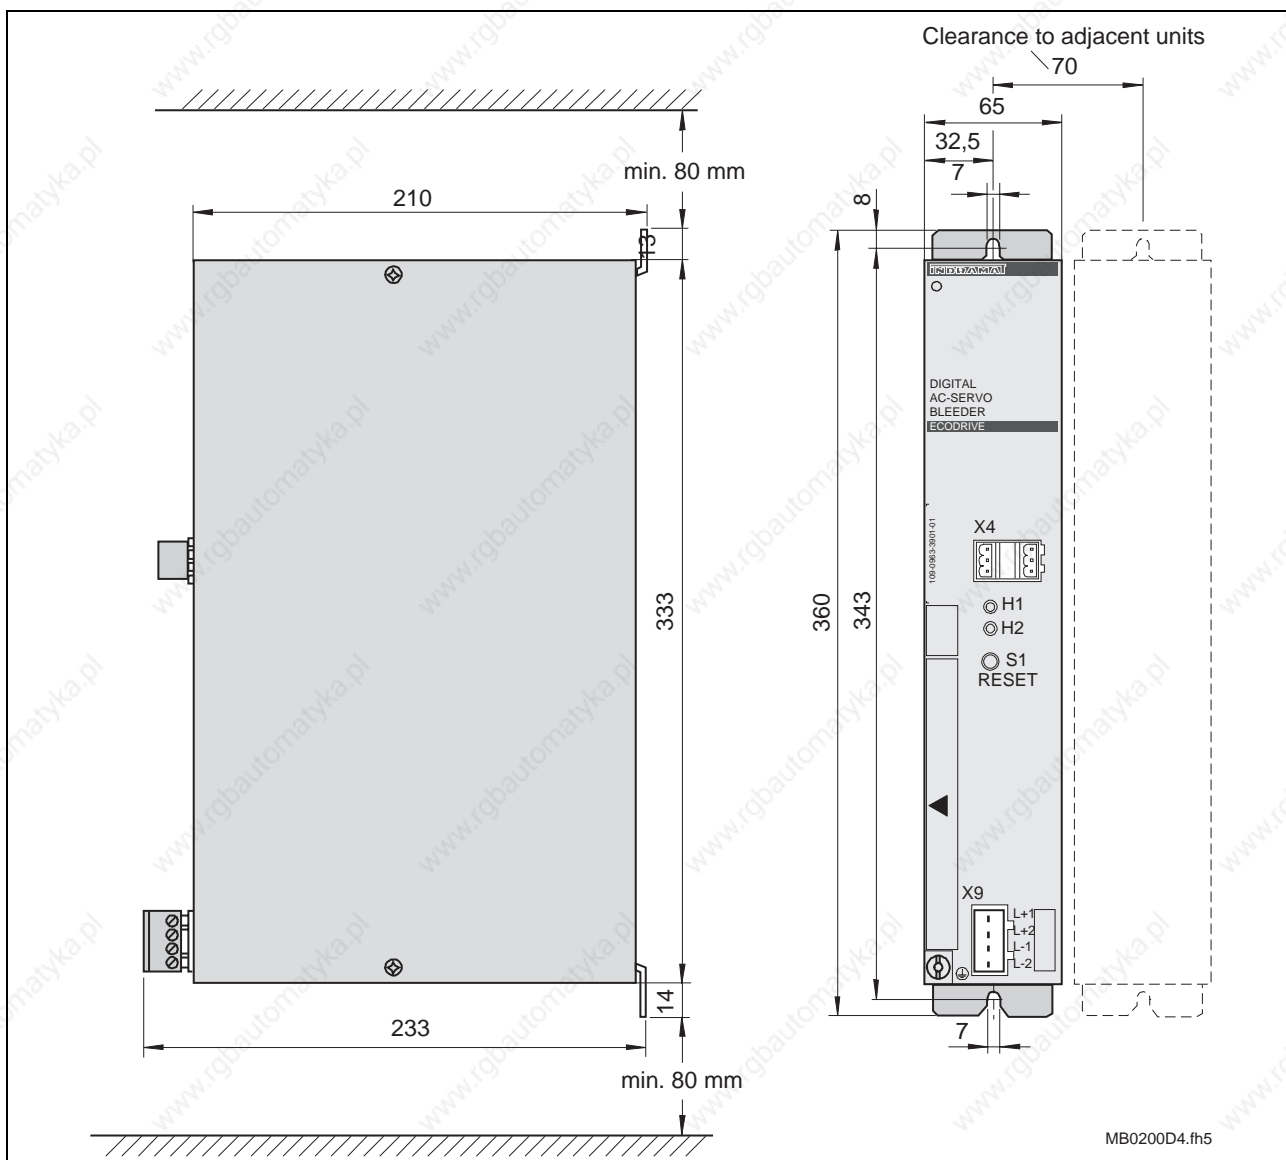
Dimensions of the auxiliary bleeding module BZM01.1
